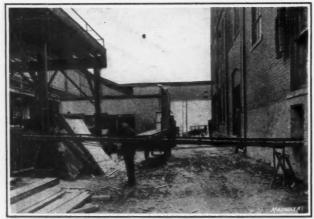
This illustration shows the gravity carrier leading from the spiral chute shown in Fig. 89 to the machining shop. The carrier is suspended on cables so that it may be raised to provide the necessary head room for a team to go underneath
